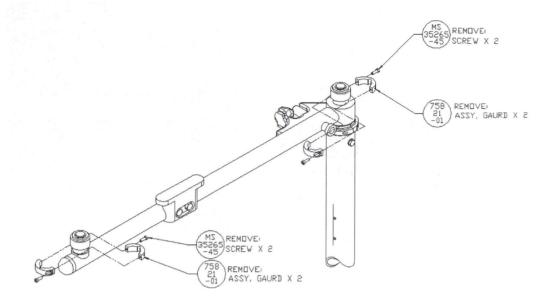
A-2 REMOVAL OF GUARD RINGS
